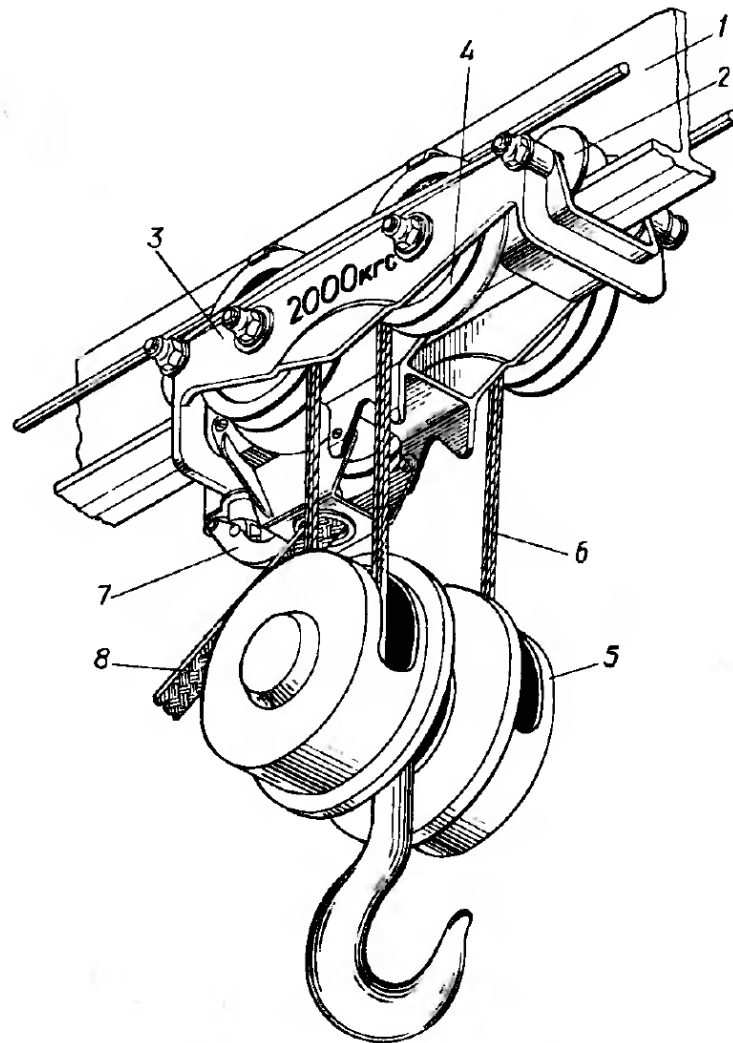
Telfer carriage with a loading capacity of 2000 kg: 1 – monorail; 2 – roller slides; 3 – carriage body; 4 – rollers; 5 – movable block with cargo hook; 6 – cable; 7 – carriage stopper; 8 – strap
